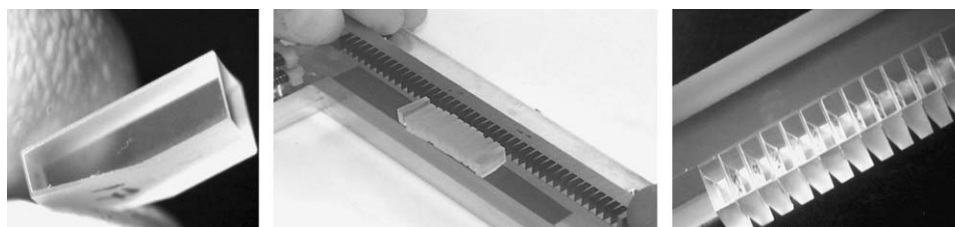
Pupil mirror row. Single mirror (left), assembling tool (centre) and assembled row (right).
